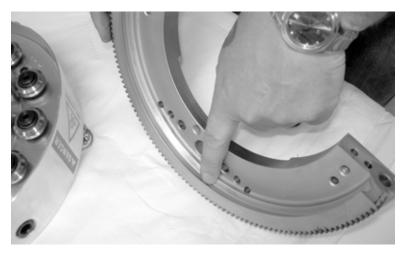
Check the bearing raceway for chips and clean it if necessary.
